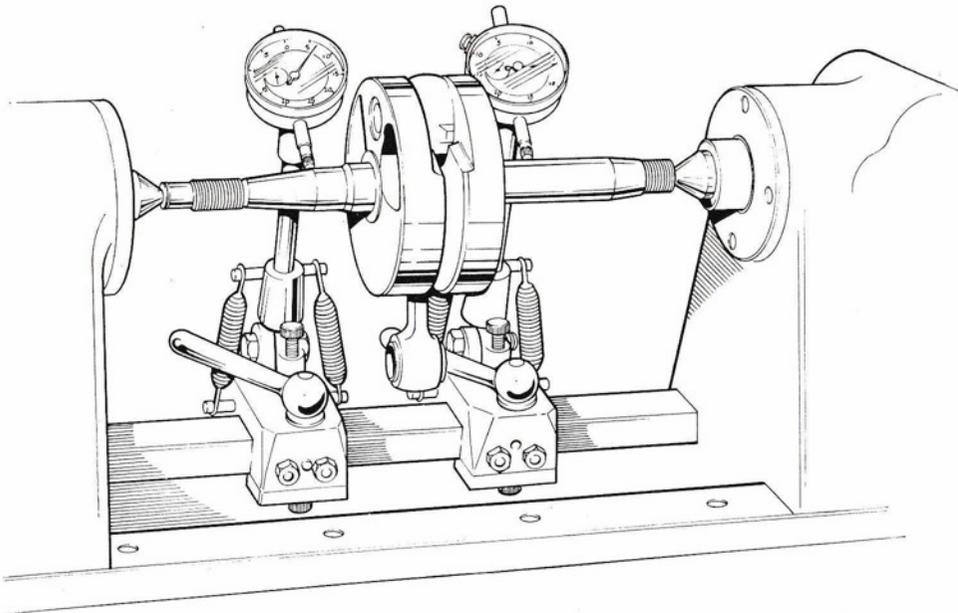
Crankshaft assembly mounted between centers for checking truth.
